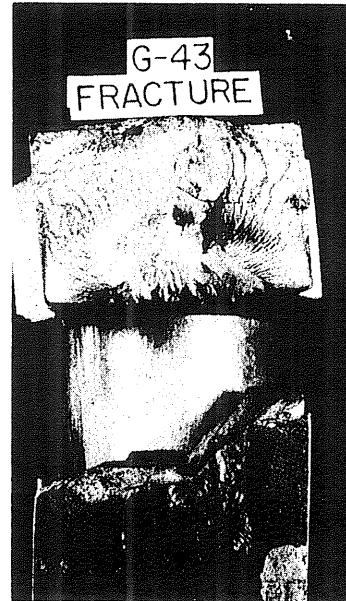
VARIOUS FRACTURE MODES FOR TRANSVERSE BUTT WELDS IN THE AS-WELDED CONDITION.
